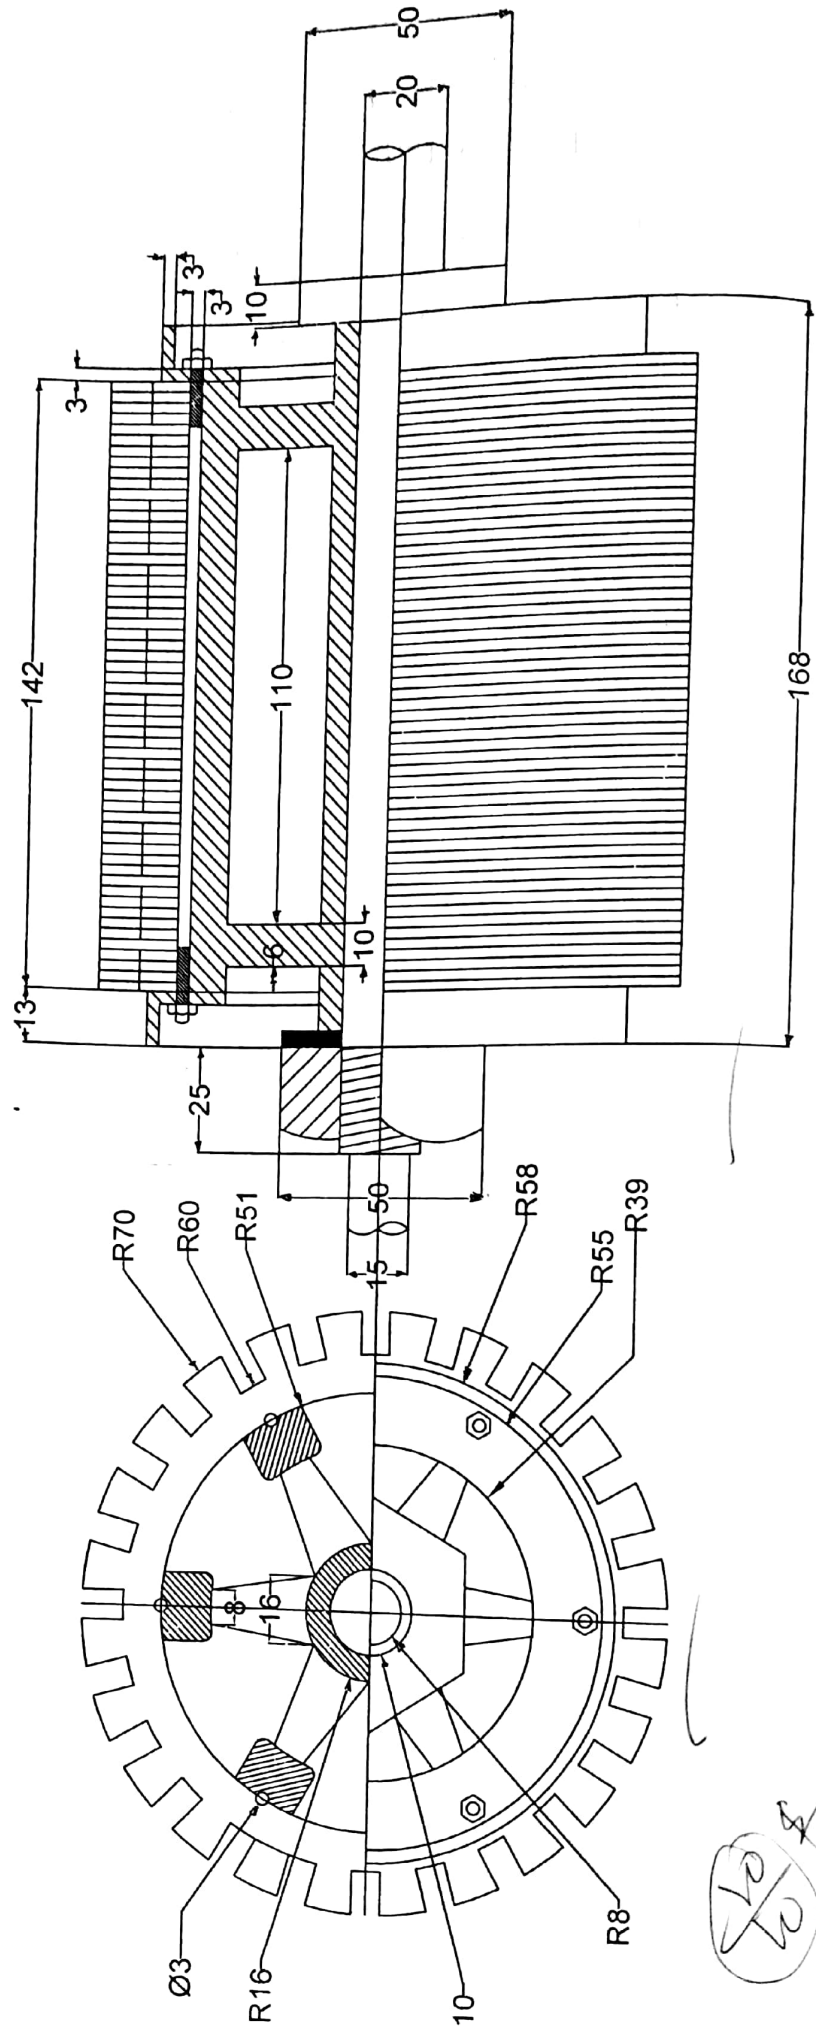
DETAILS OF PARTS OF ARMATURE OF A D.C. MACHINE
